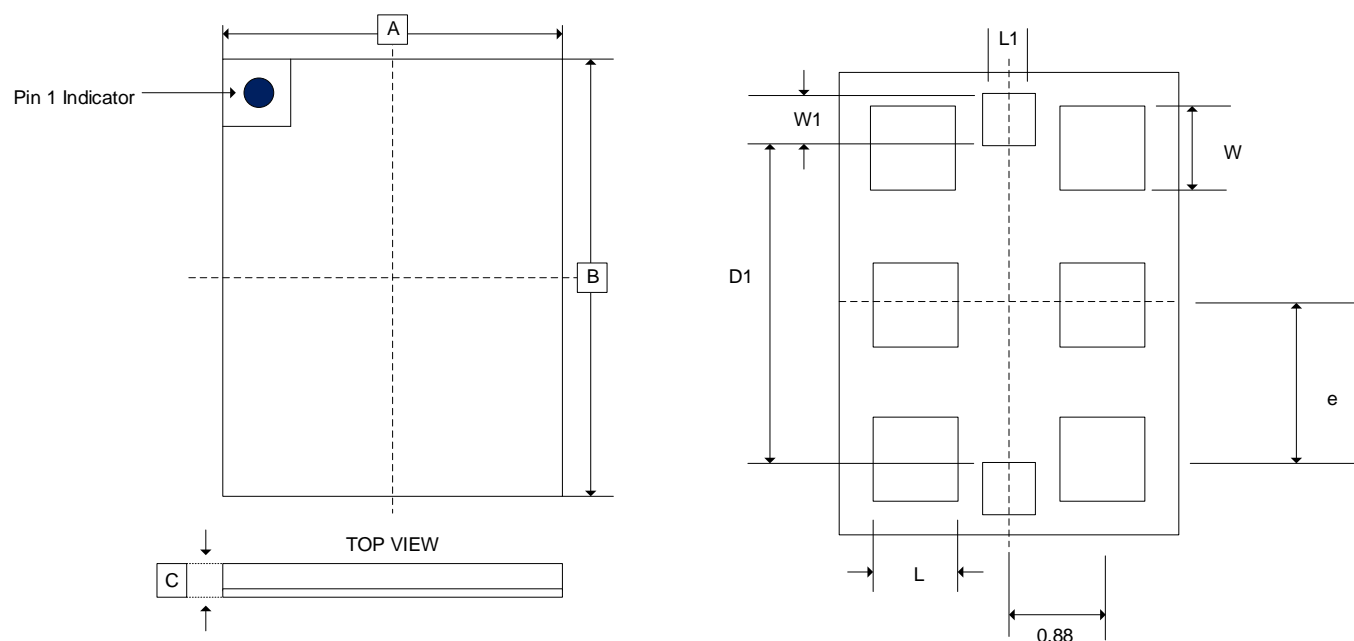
MS1310 Packaging Drawing (3.2mm x 2.5 mm)
